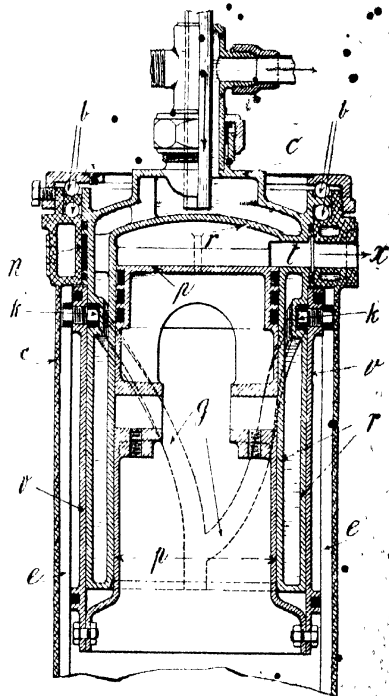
Sectional elevation of Parker's motor, showing combined cylinder and valve rotated by cams engaging with an outer sleeve on the piston.
